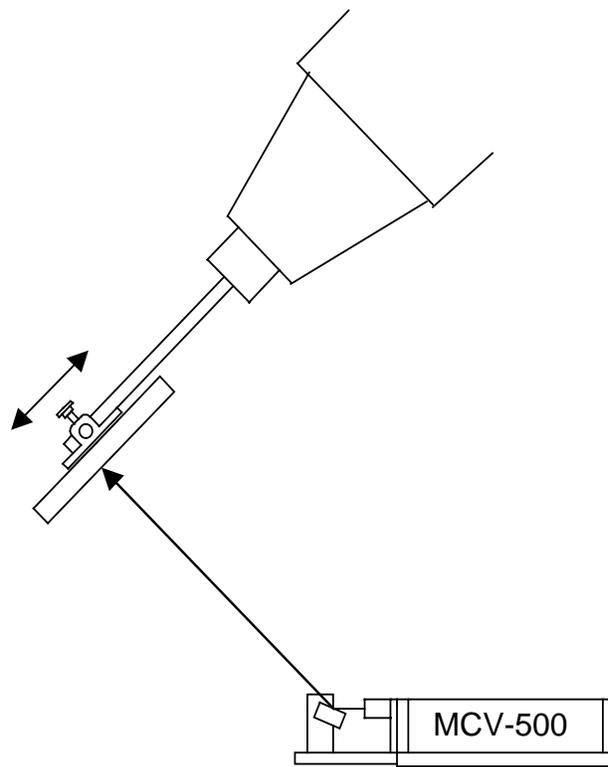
Non-contact measurement of rotational angle of a 5-axis machine
